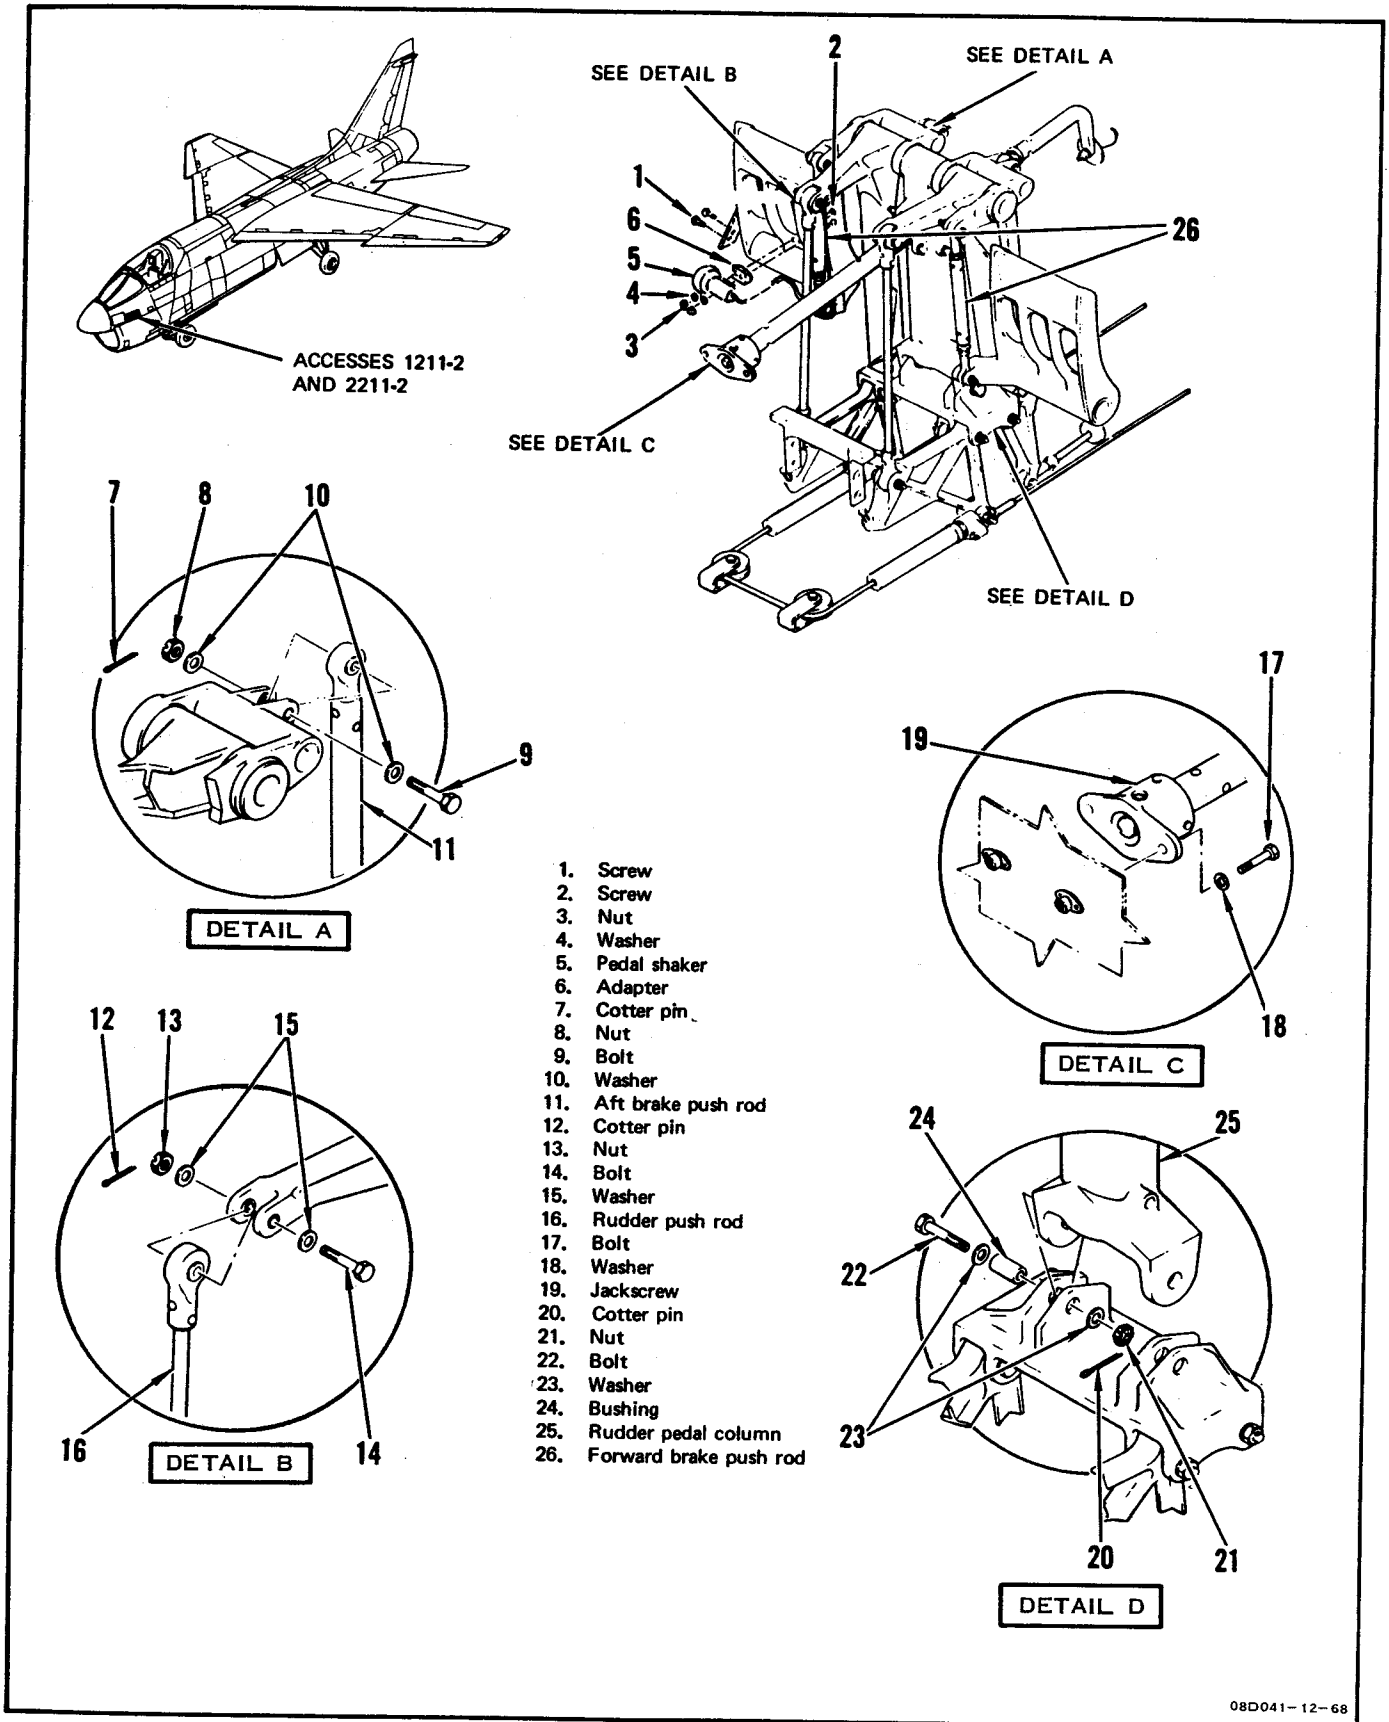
Rudder Pedal Assembly Removal and Installation
